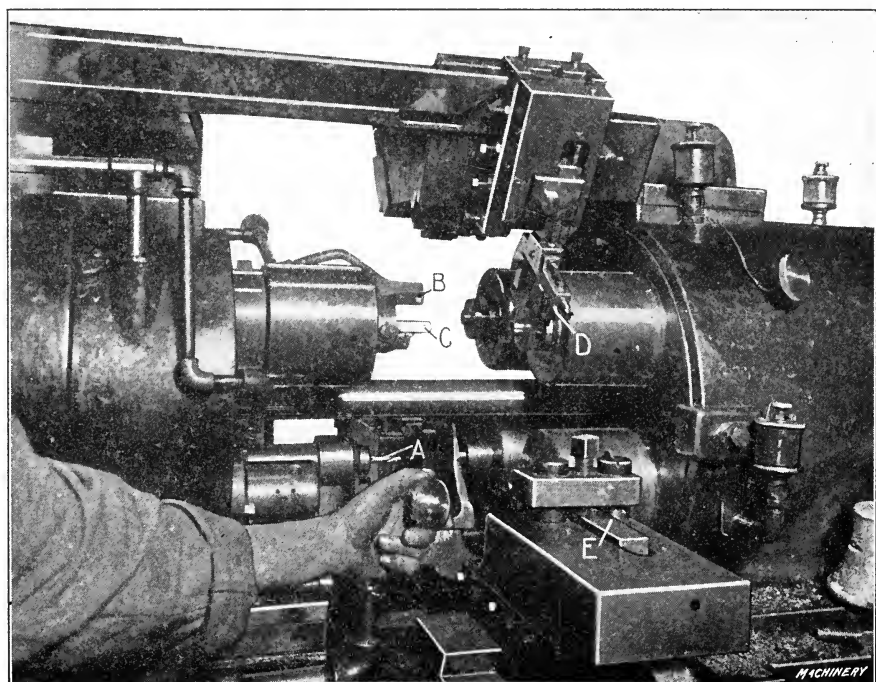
Tool Equipment for Producing a Brass Thumb-nut
